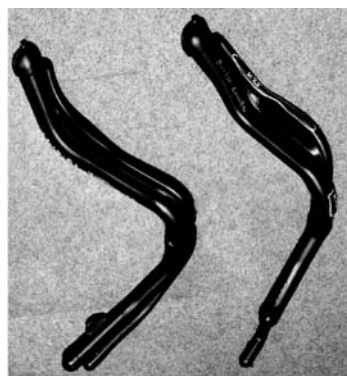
Parison manipulation/segmented mould. Co-extrusion of a 6-layer filler pipe
